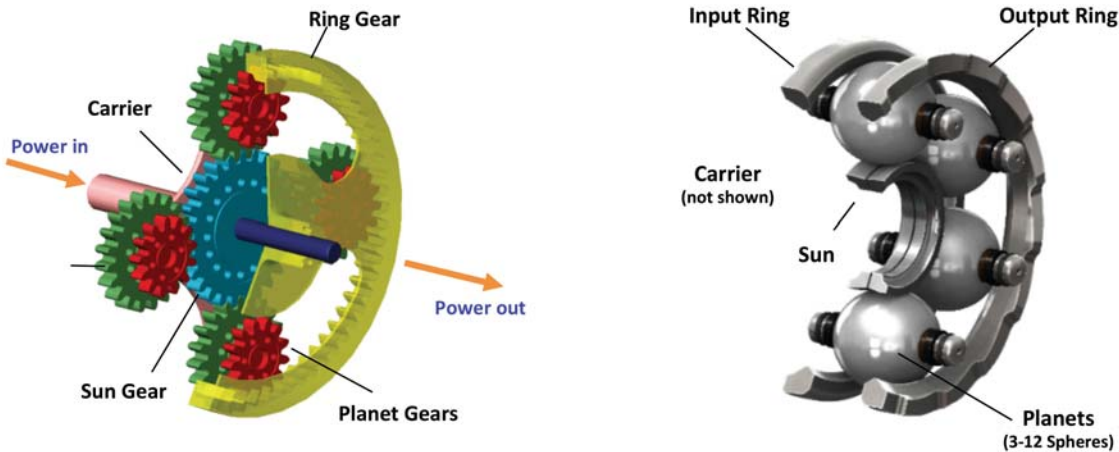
A CVP is a planetary gear set that uses spheres instead of gears
